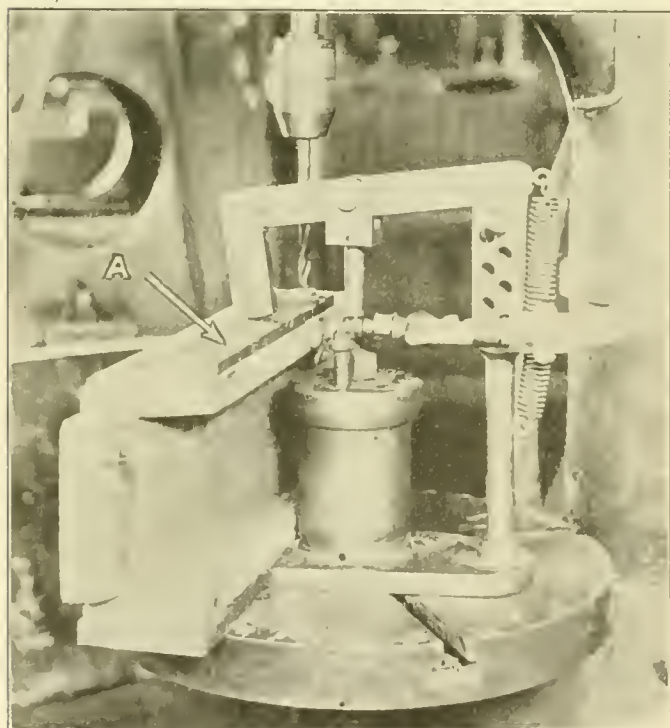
Jig Used When Drilling 3/8-In. Location Holes
